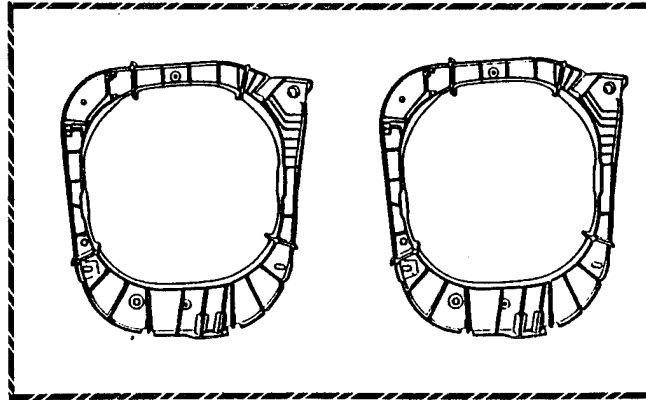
Large (48 inches x 40 inches) Nacelle Frames to be Made from Electron Beam Welded as-HIP Shapes using Ti-6Al-6V-2SN Powder.
